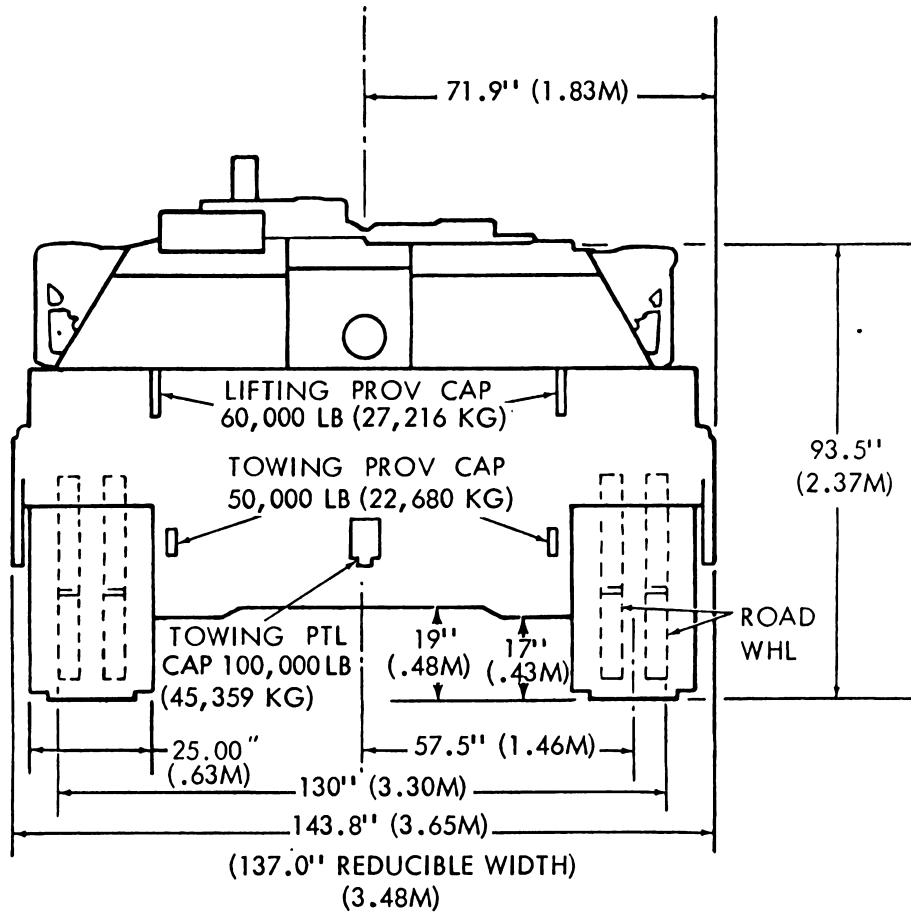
Transportability drawing, rear-end elevation, M1 tank.
